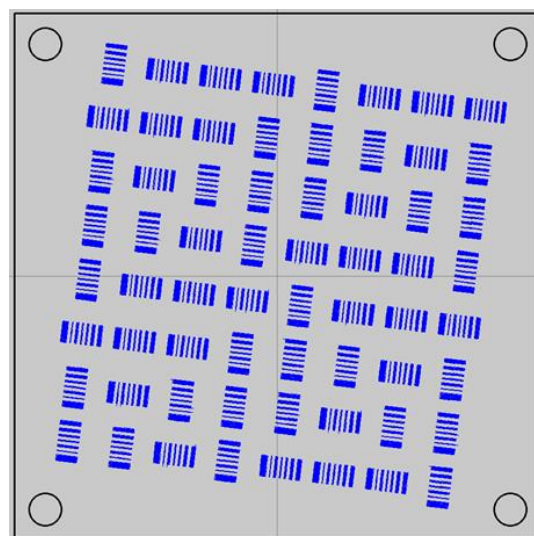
Jailhouse Build Layout of 64 Parts on Build Plate
